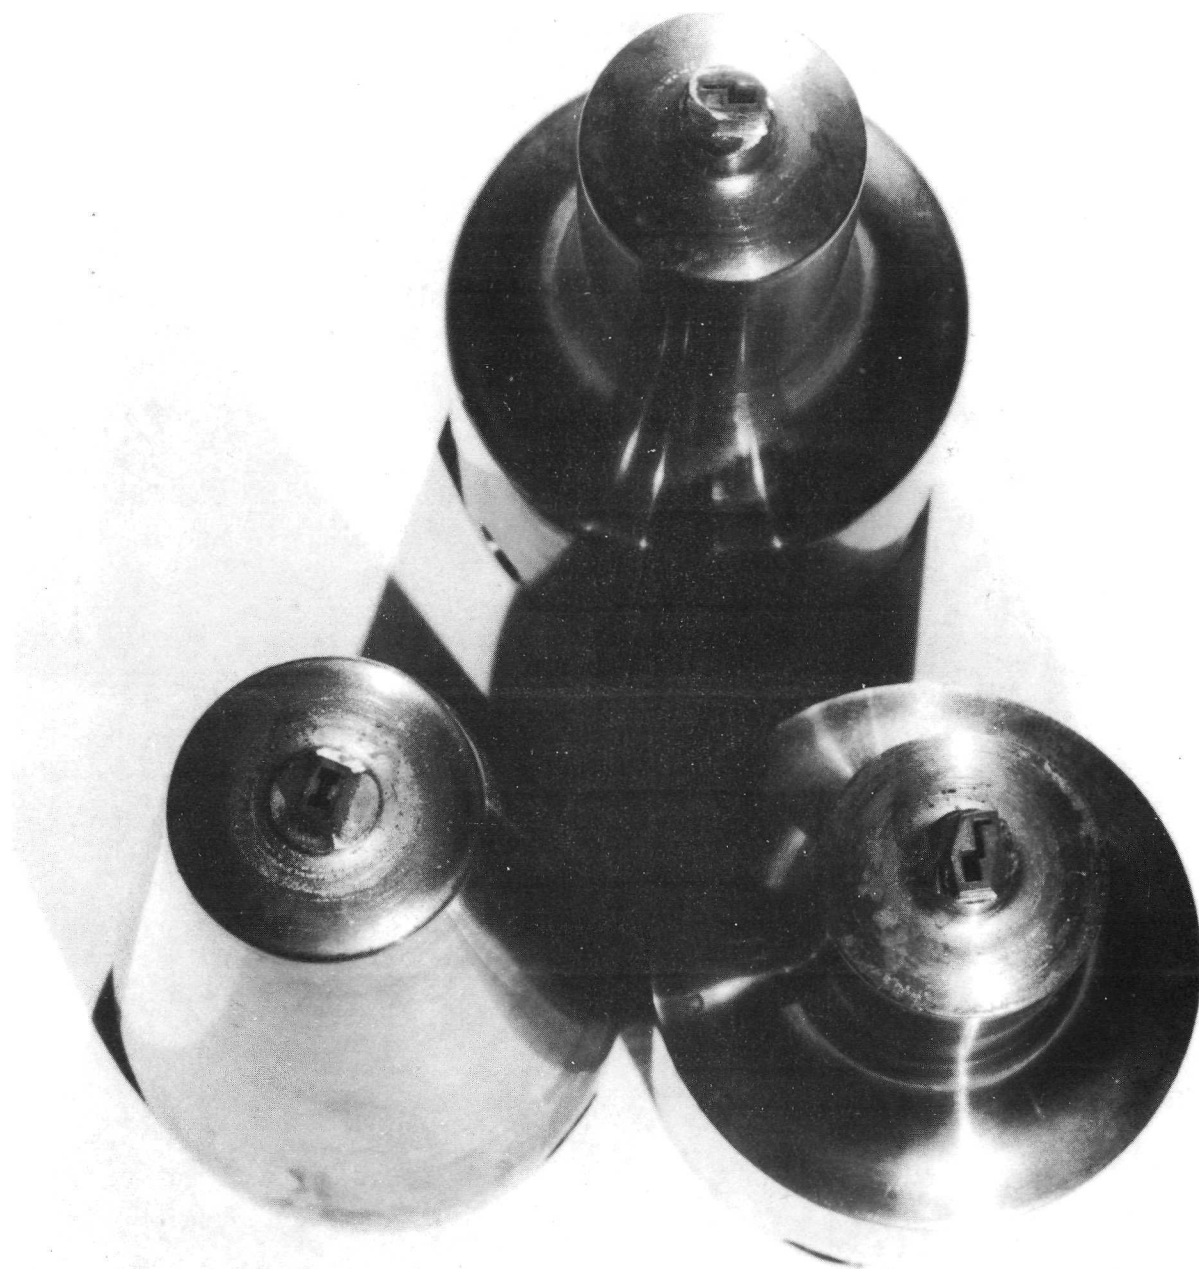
Ultrasonic Impact Grinding Tools for Single Probe Design
